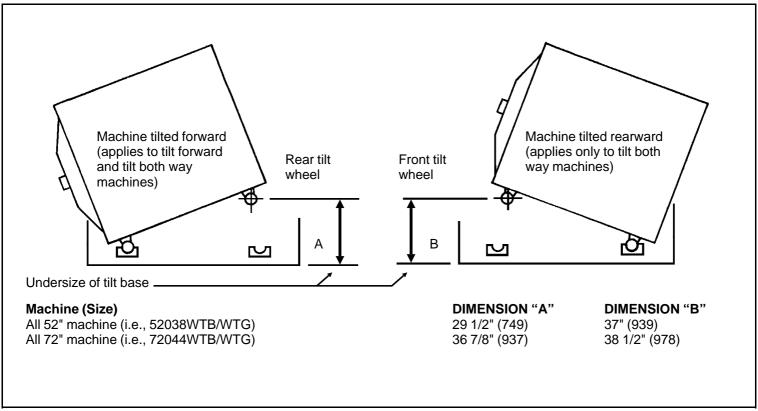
(MSSMA415AE) Right Side Views of Machine Tilted
